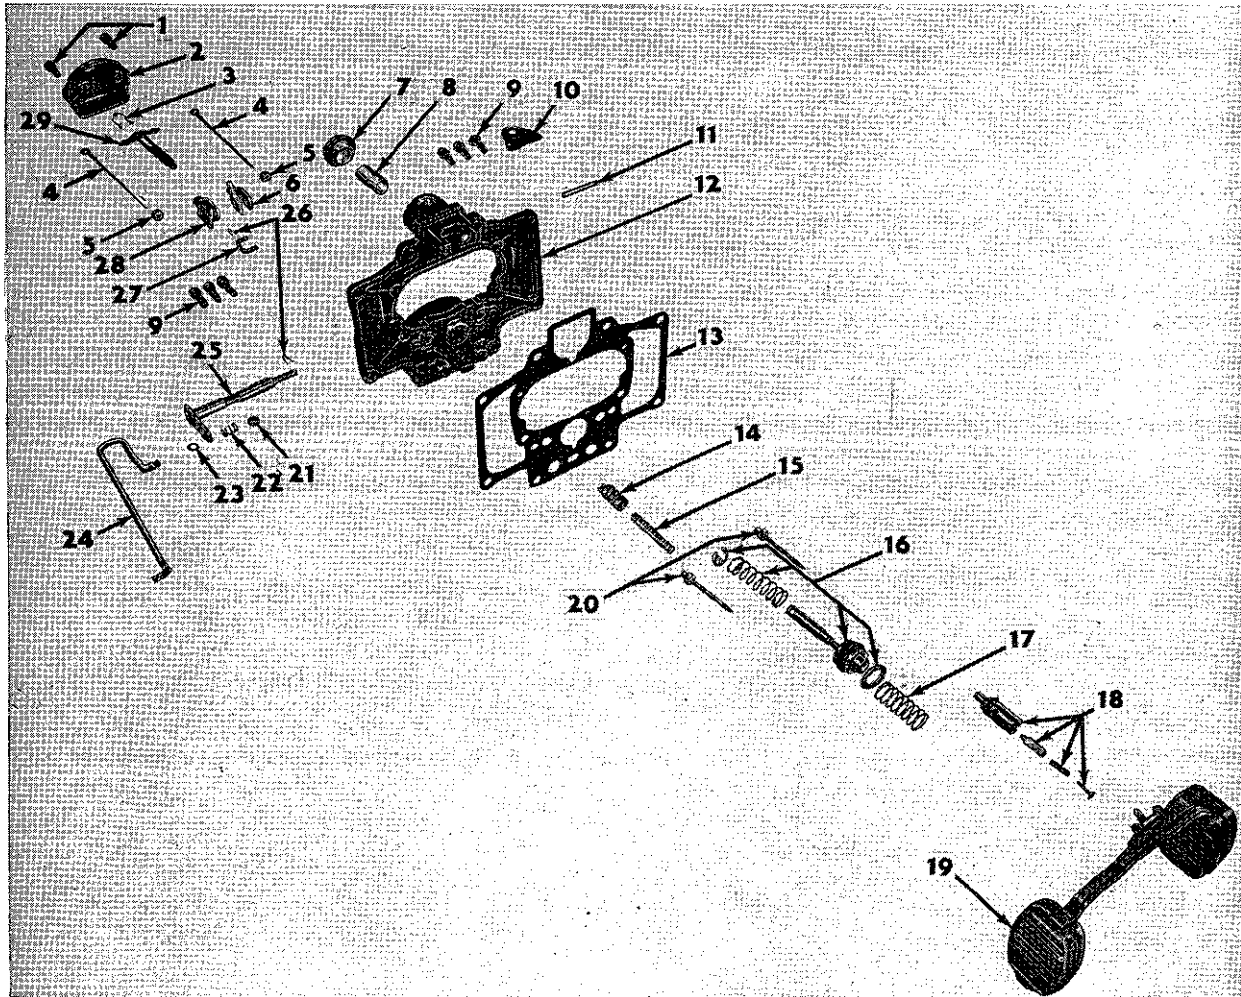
2204S CARBURETOR BOWL COVER AND ATTACHING PARTS
